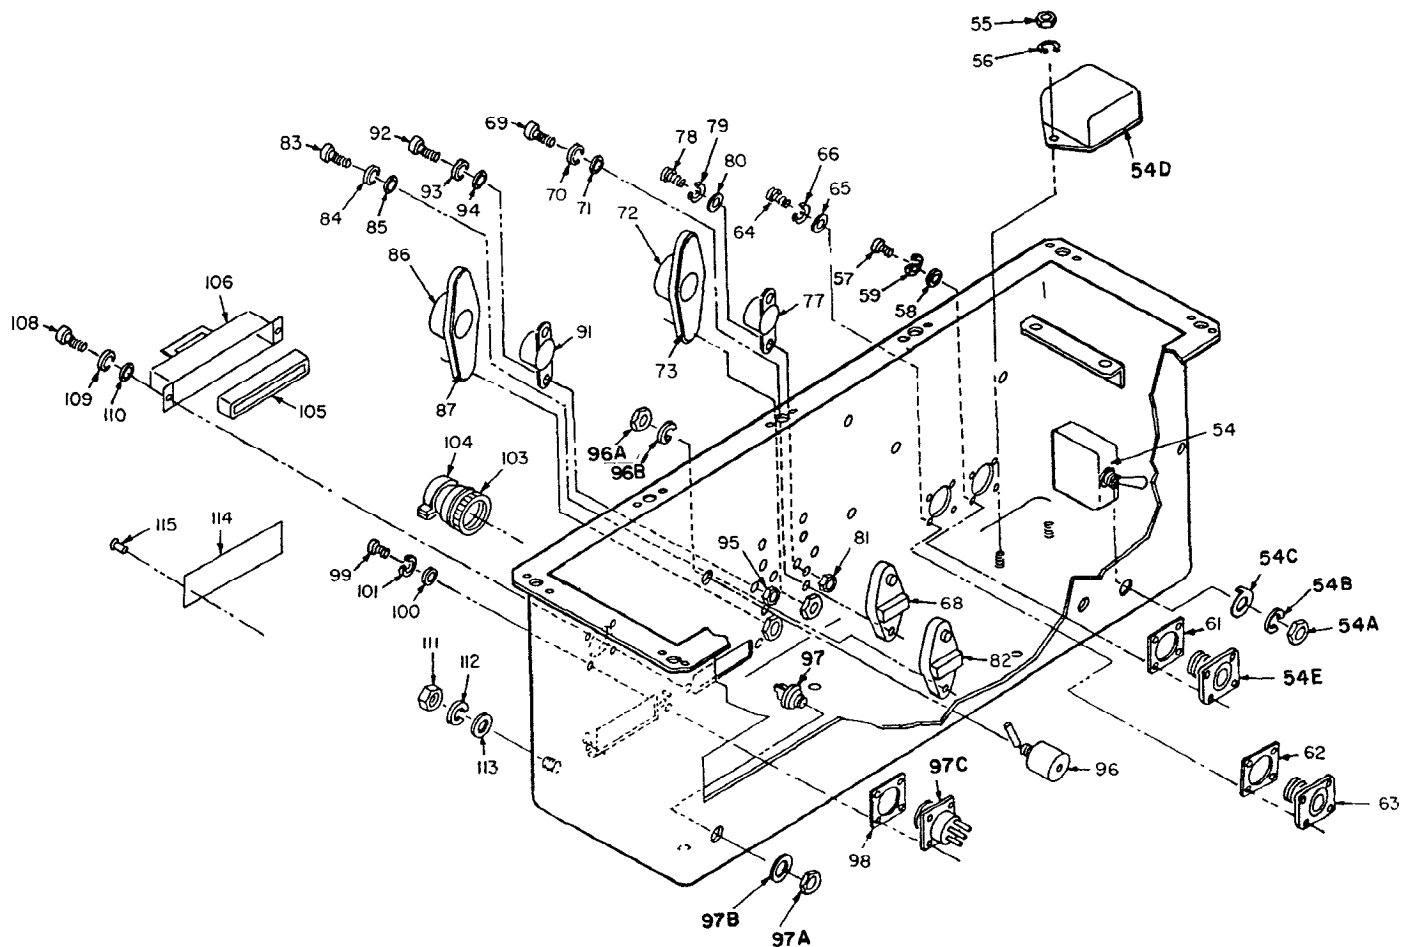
Recorder Assembly (Sheet 3 of 3)
